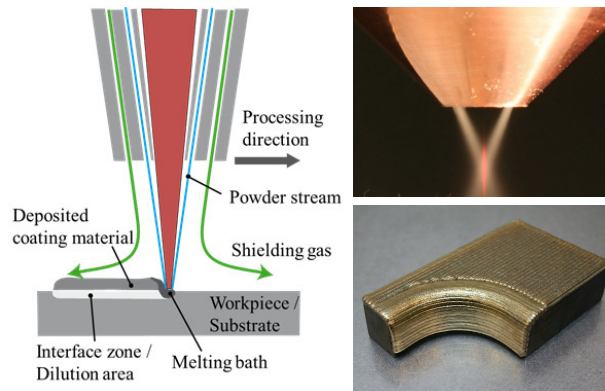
Schematic process principle – laser cladding (left); welding optics (top right); tool surface coated with Cu85 (bottom right).
